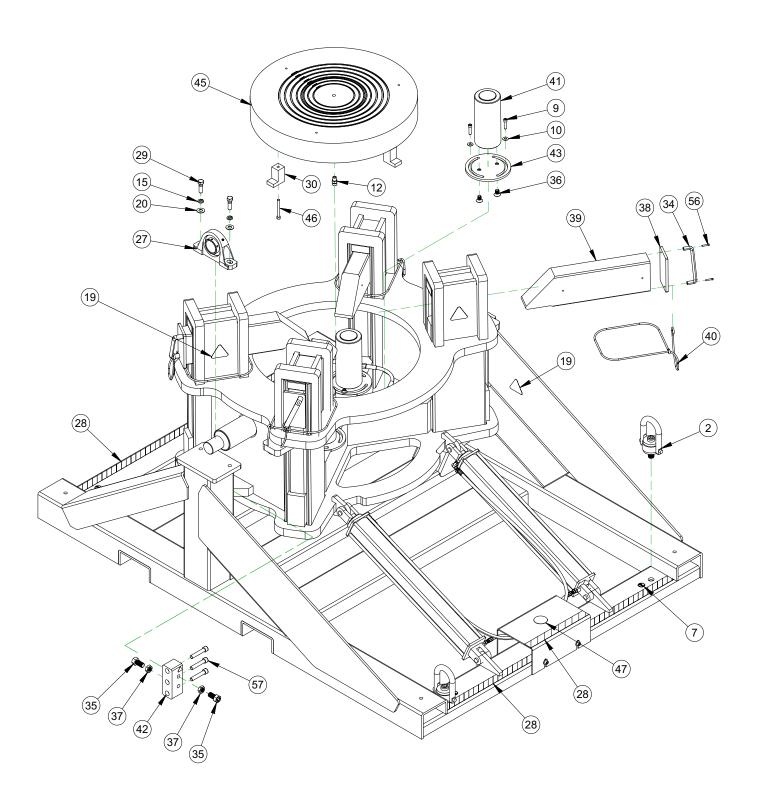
UFV-24-300T ASSEMBLY 2 (P/N 91681)
